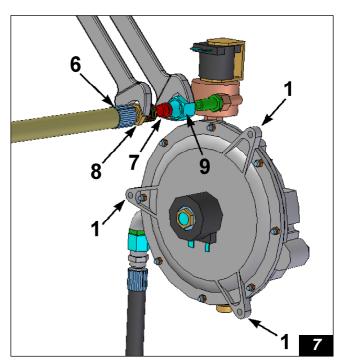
shows proper connection, with a suitable hose on which the fitting (6) is tightened. Fit the ogive (7), hold the fixed hexagon ring (8) by means of a wrench and tighten the ring nut (9).
